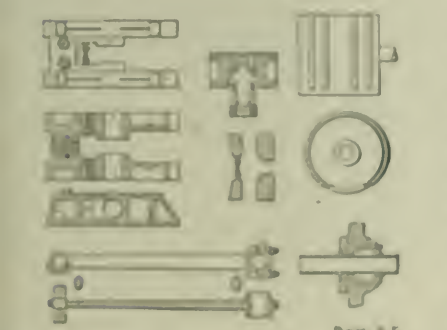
PISTON, CROSSHEAD, ROD AND LONG SLAVE
